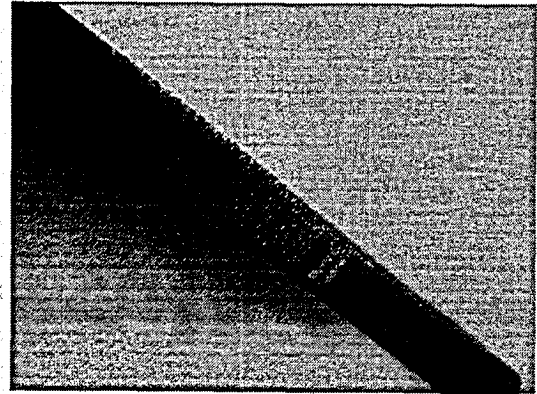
Bands on fatigue fracture surface at larger values of the crack length.
